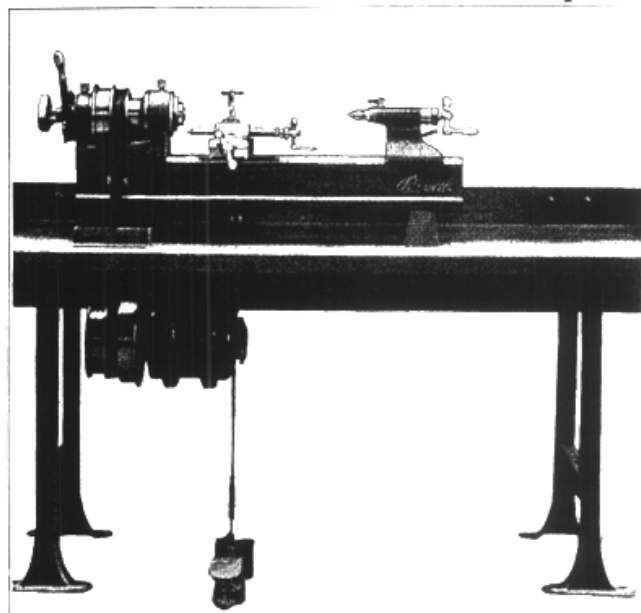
Rivett Series 505 ball-bearing, high-speed lathe on bench with Direct Motor Drive (Patents Pending)
